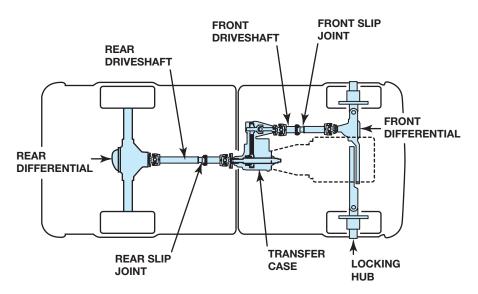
This four-wheel-drive (4WD) vehicle drivetrain consists of the components of a RWD drivetrain plus a transfer case, front driveshaft, and front drive axle.
